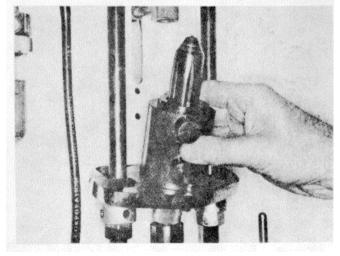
H-32. Installing the Injector in ST-990 7. Adjust the knurled knob to obtain the proper clearance with a feeler gauge between the knob and the locknuts, Figure 16H-33. Do not adjust the locknuts.
